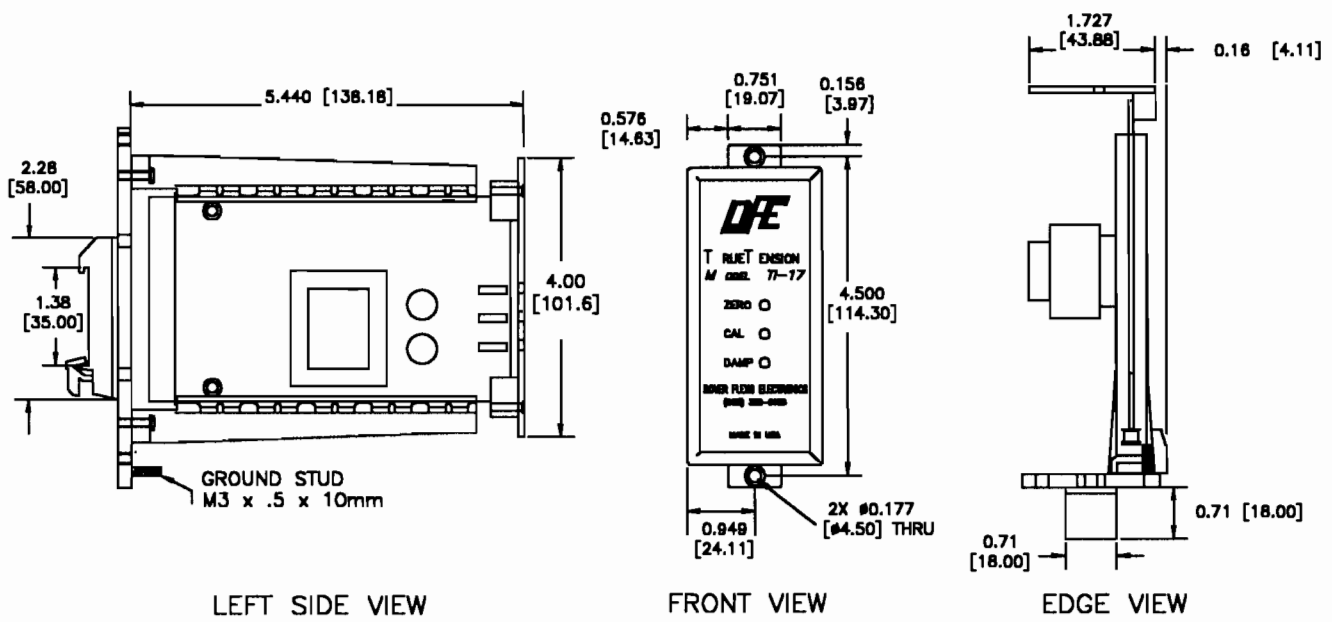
VERTICAL MOUNTING DIMENSIONS
